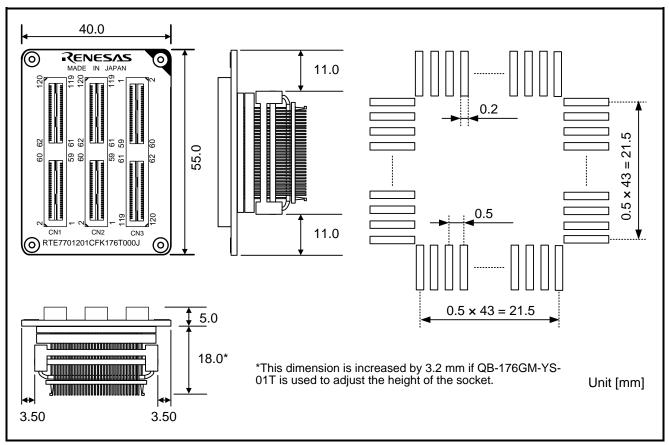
Drawing with Dimensions and a Pad Pattern for Reference
